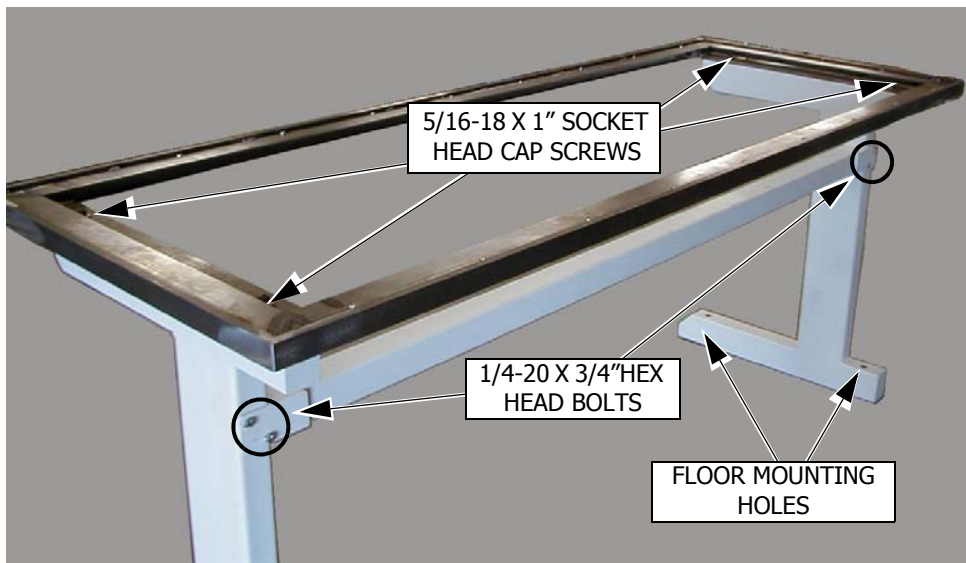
QT-720 Table Assembly (Viewed from Rear)
